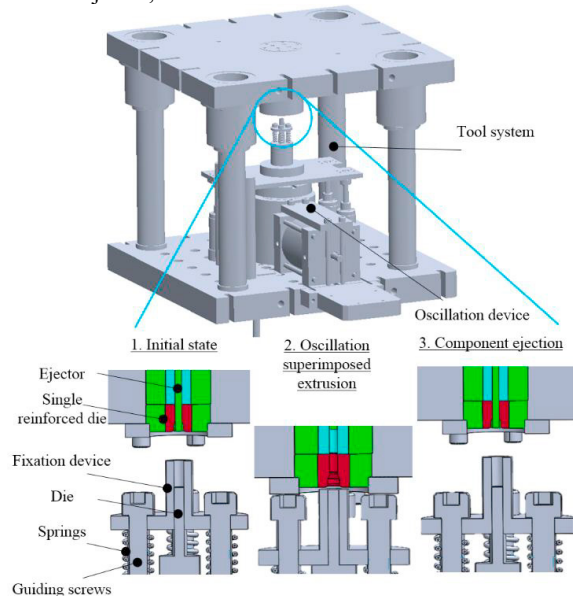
Tool system for oscillation superposed wear experiments in an industry like extrusion process
